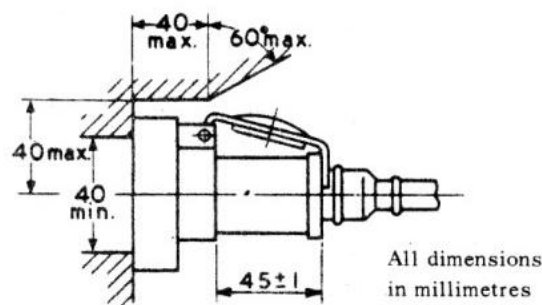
Plug and socket assembly showing clearance dimensions for mounting on towing vehicle.
